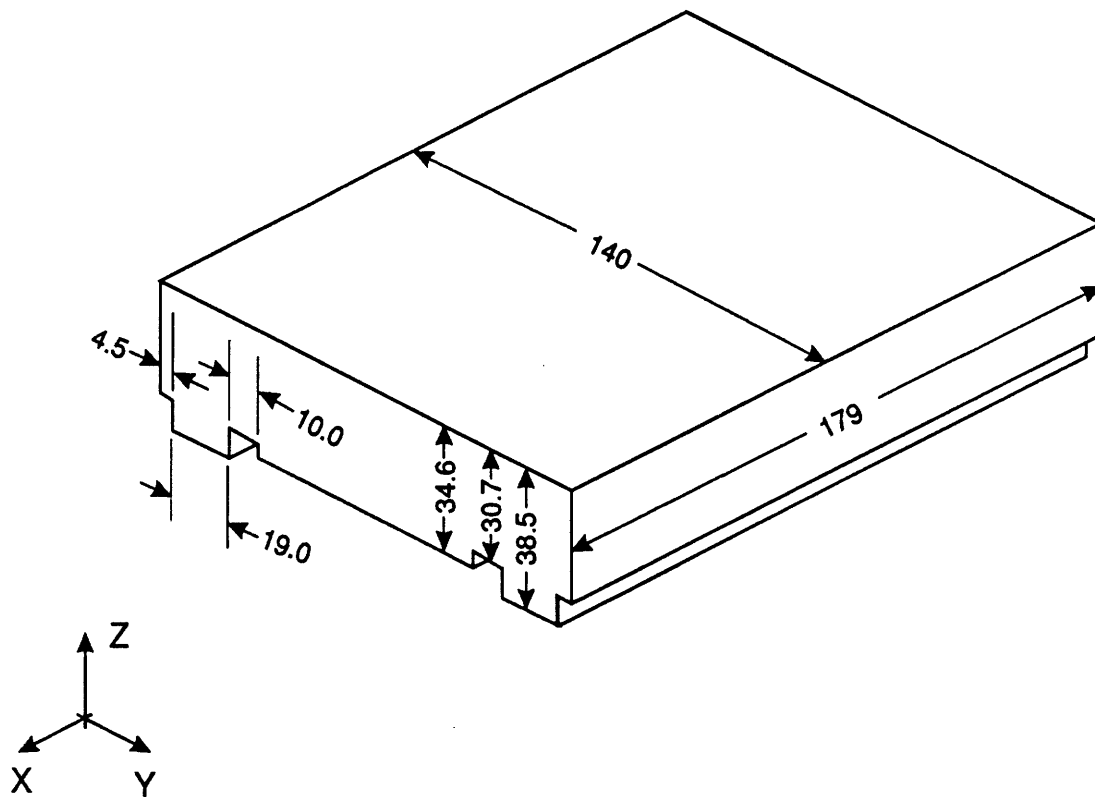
Drawing of enlarged model of 3380 slider with dimensions in millimeters.
